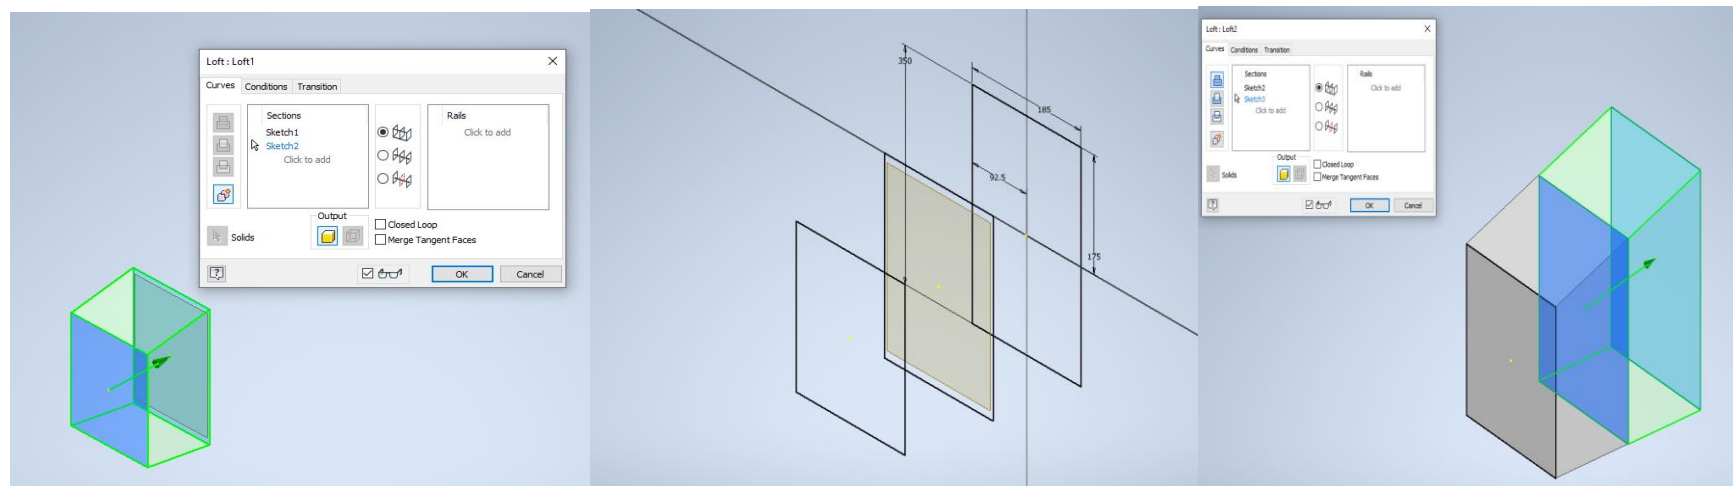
Drawing the upper section of the Main Diffuser Section of the chamber 2 (b).
